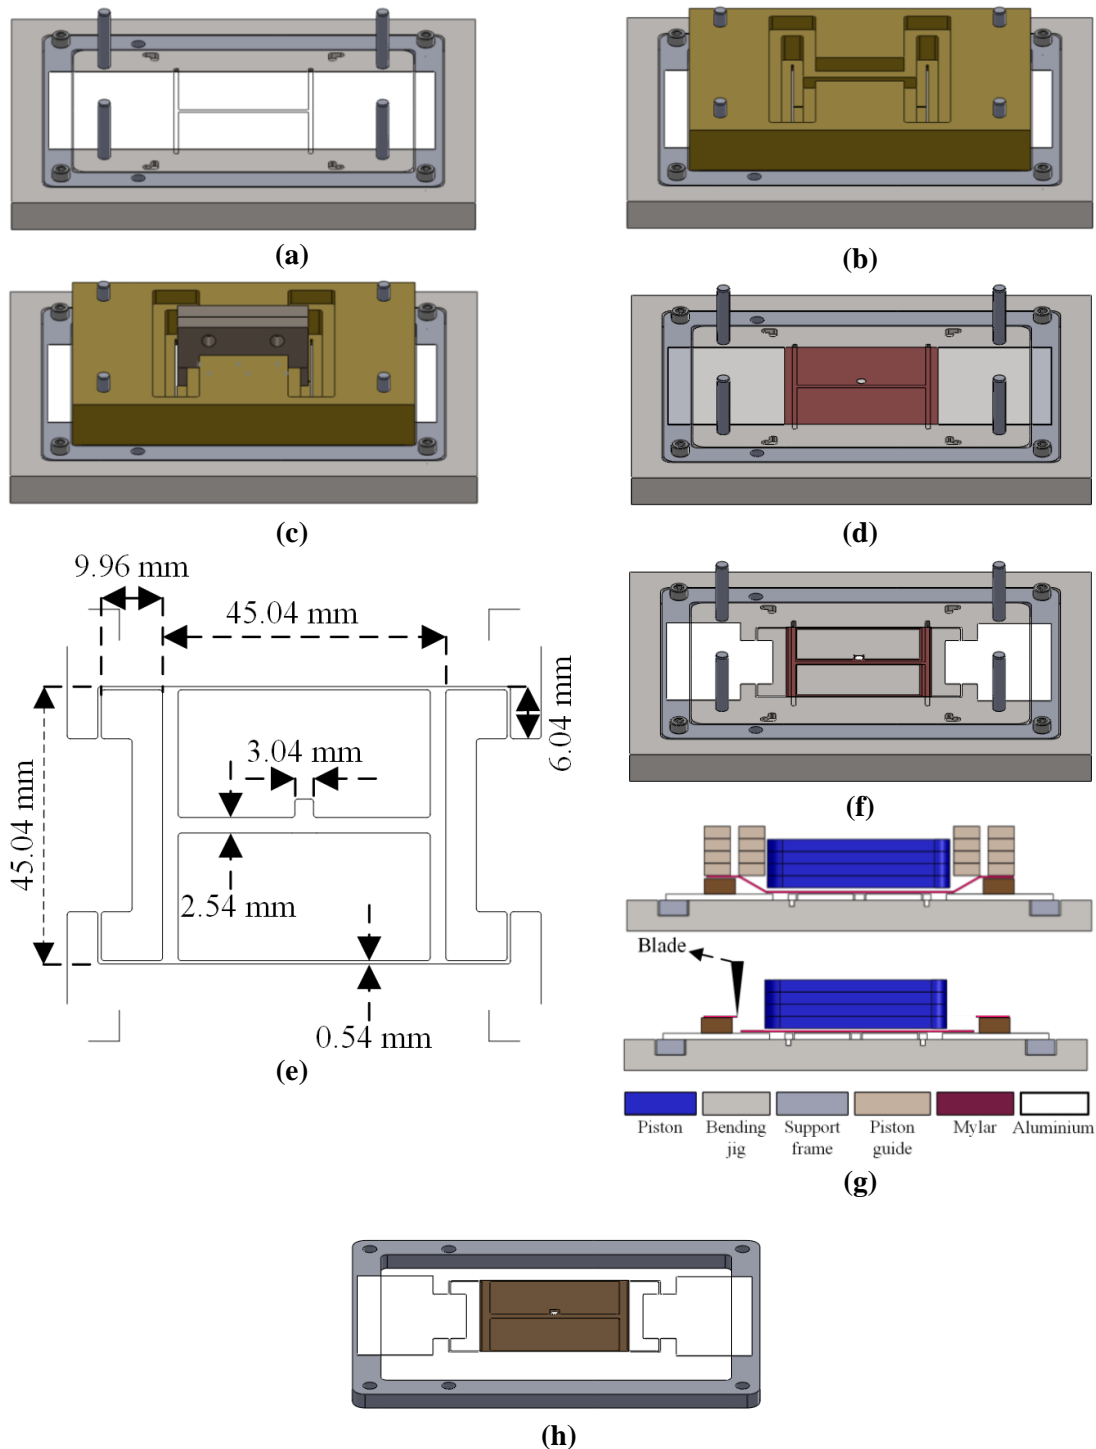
Plate manufacturing process steps. (a) Aluminium mother plate stuck on the bending jig and the support frame. (b) Punch guide jig aligned with the dowel pins to sandwich the plate in between. (c) The punching process. The punch is pressed using a punching press. (d) Pre-cut ARclear® 8154 transferred to the plate using the vacuum chuck. Alignment achieved using the dowel pins. (e) The CAD-drawing for cutting aluminium plate. (f) After cutting, the extra aluminium stuck on the bending jig are removed. (g) Mylar attached on the frame and cut with a blade to release it. (h) Another laser cut for Mylar to keep it only on the frame region and then releasing the final plate intercepting plate from the bending jig.
